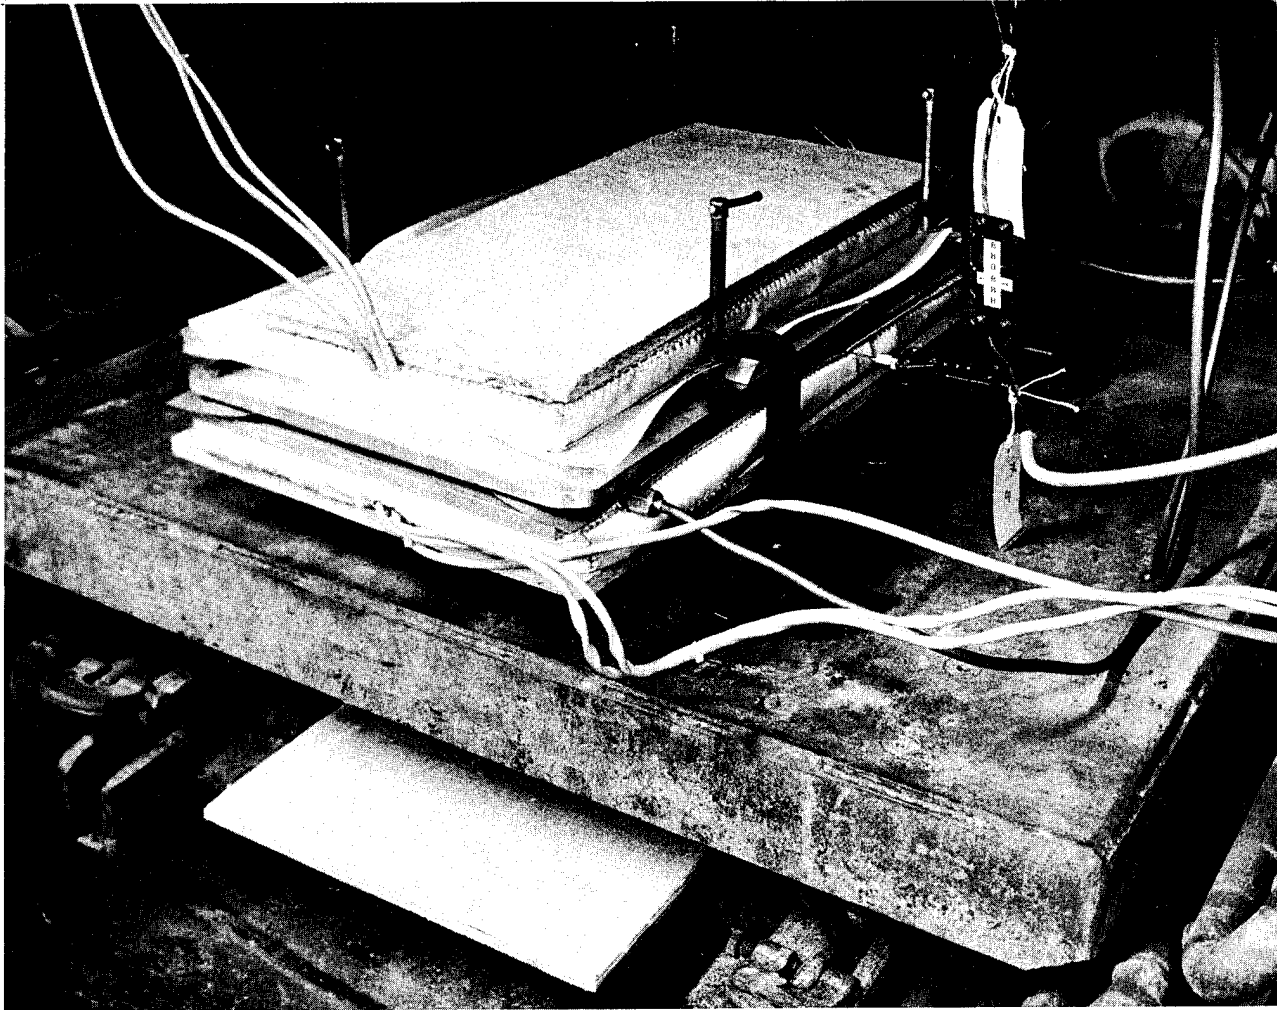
Locally Heated Autoclave Bag Assembly Ready to Run.
